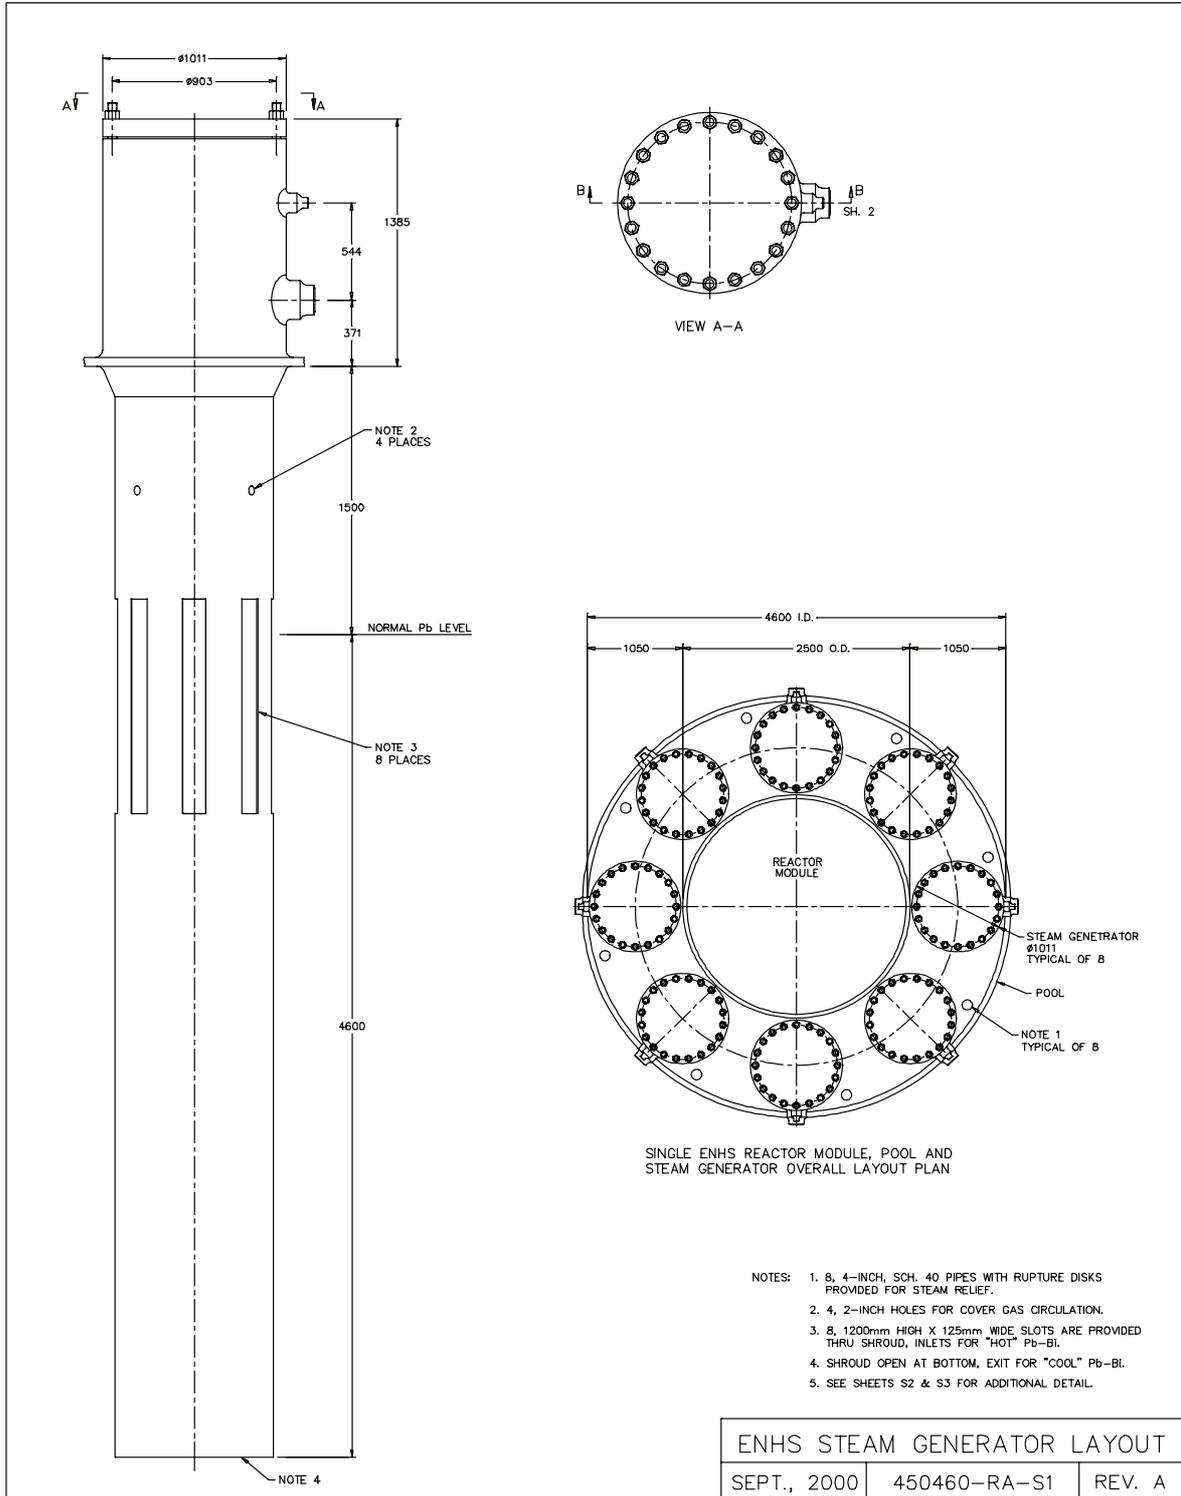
ENHS steam generator overall elevation view and ENHS module layout plan.
